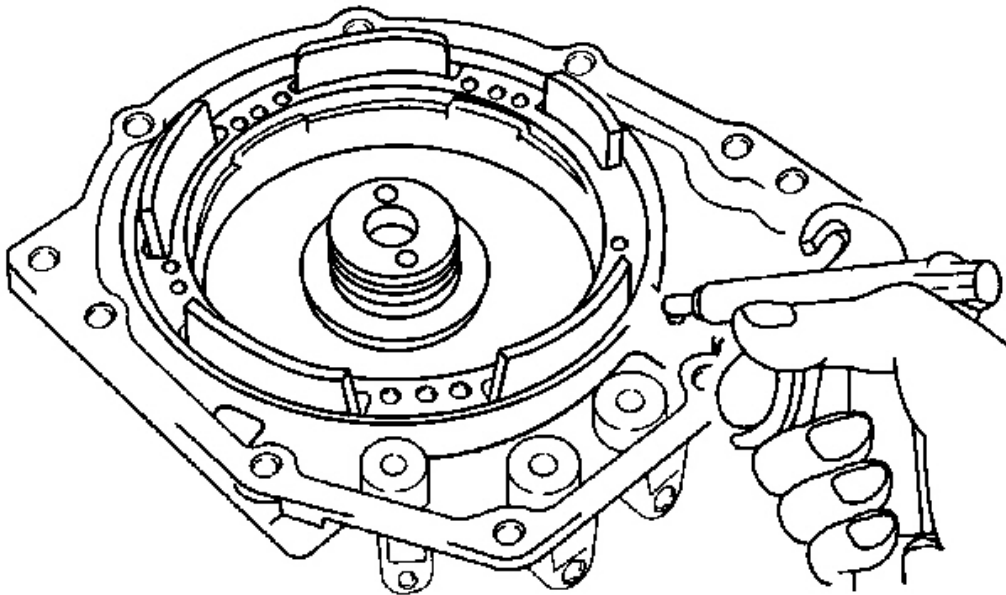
Applying Compressed Air To Transaxle Rear Cover To Remove O/D Brake Piston
